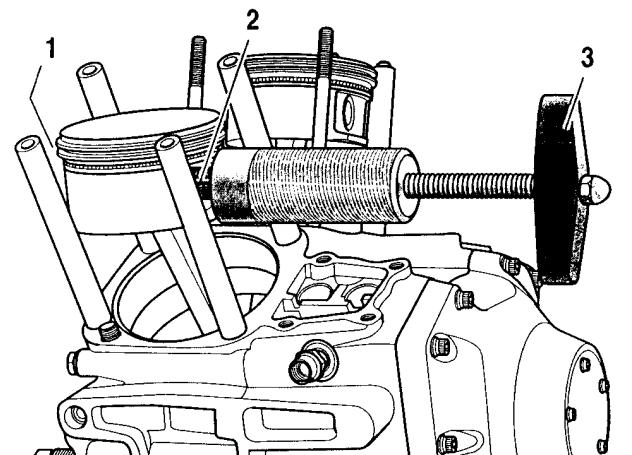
Piston Pin Remover (Part No. HD-42320-A)
